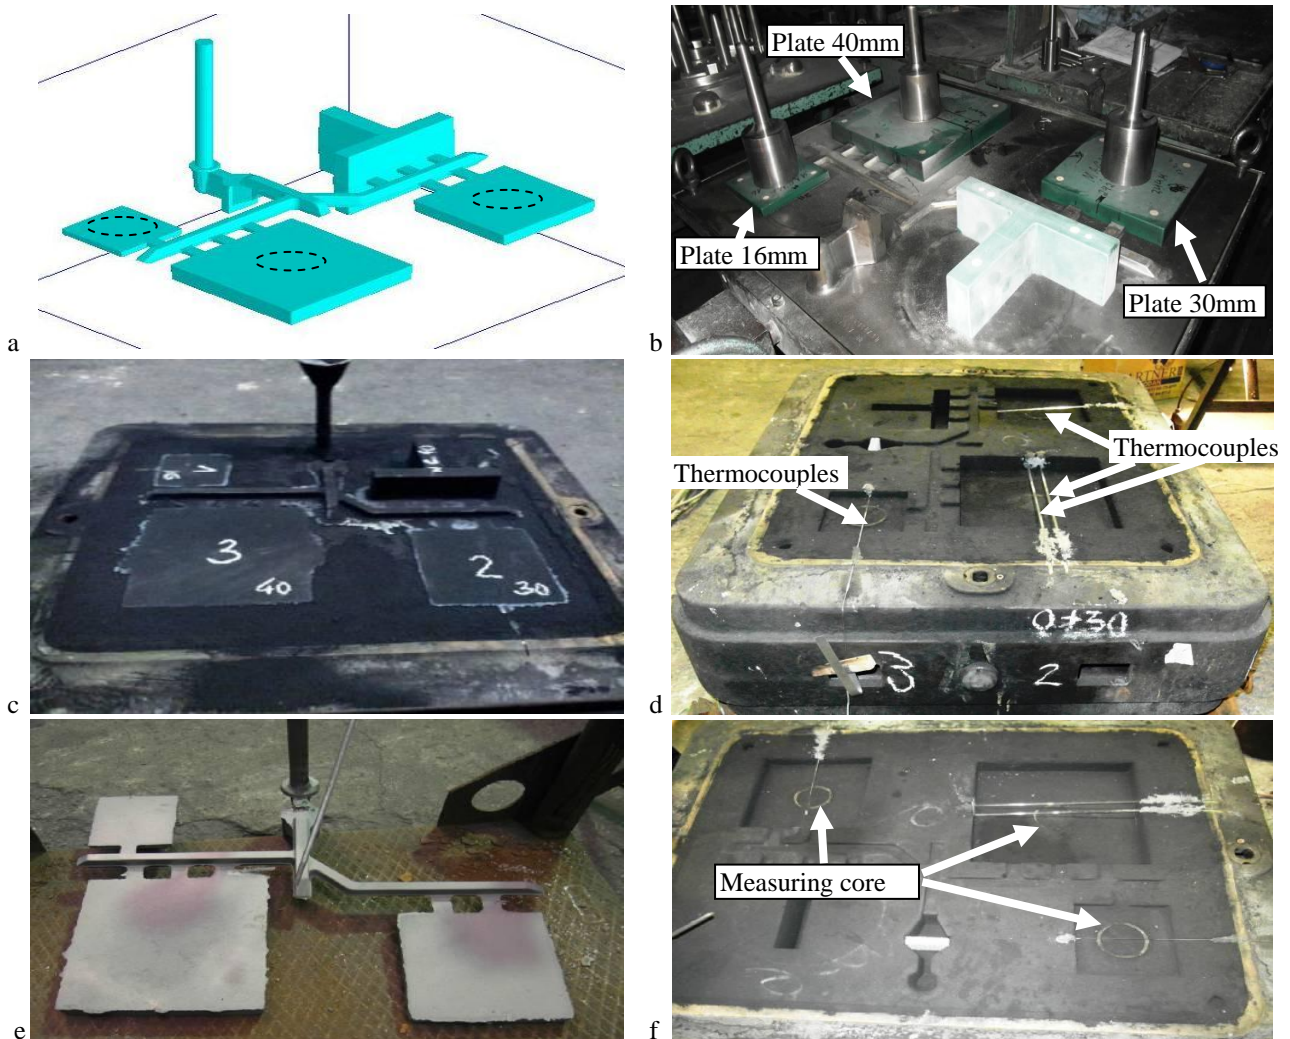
Casting arrangement in the mould. a – CAD model, b – pattern plate, c,d – mould instrumentation, e – mould disassembly, f – raw casting knocking out
